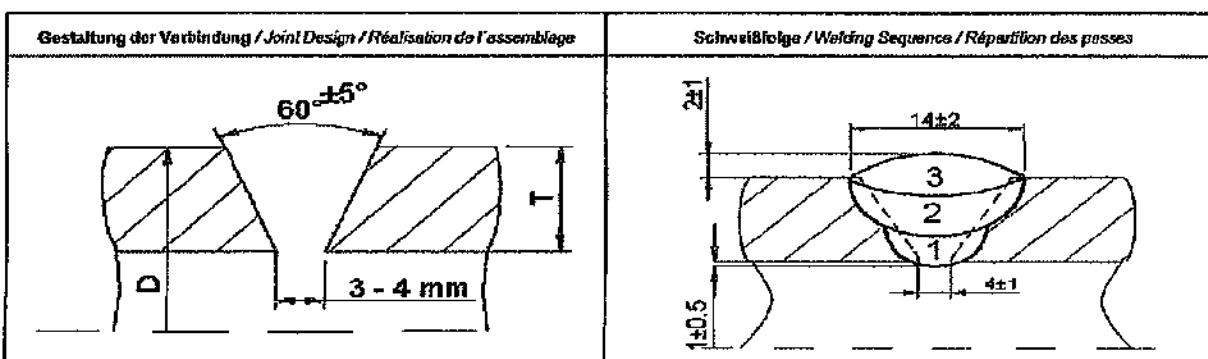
DETAILS OF WELD TEST (1) / DEFINITION DU TEMOIN SOUDÉ (1)
